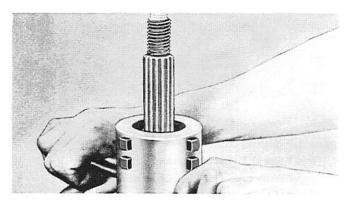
Installing (Removing) Gear Lock Nut C. Installation of Water Pump Body Assembly
